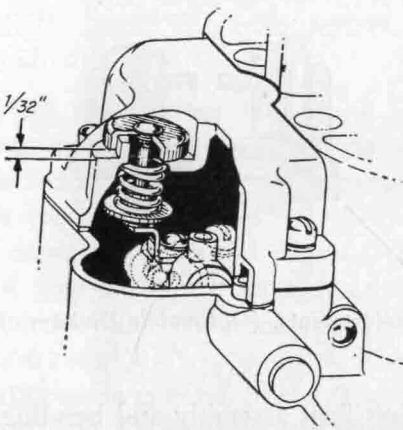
Vapor-vent adjustment. (Oldsmobile Division of General Motors Corporation)
